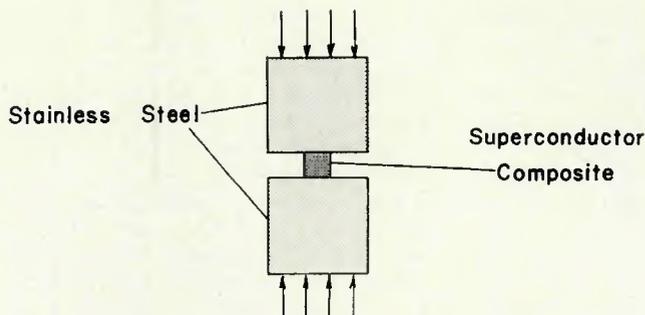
Tooling used for initial diffusion welding tests (end view)
